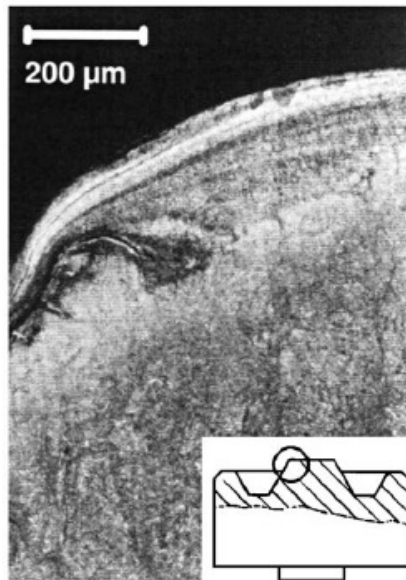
The photograph shows the plastic deformation for the convex radius of a hot-worked tool steel after 1000 forging cycles. Tool temperature: 200°C ; forging material: C45; forging temperature: $1100^{\circ}\text{C} \sim 1150^{\circ}\text{C}$; lubricated contact; cycle time: 13 seconds; hardness of tools: HRC47 (Barrau *et al.*, 2003).
